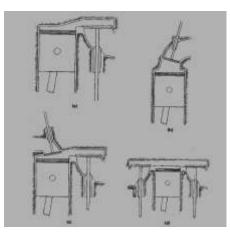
Four-stroke engine classification based on valve location (a) Valve in block, L head (b) Valve in head, I head (c) One valve in head and one valve in block, F head. (d) Valve in block on opposite sides of cylinder, T head.
